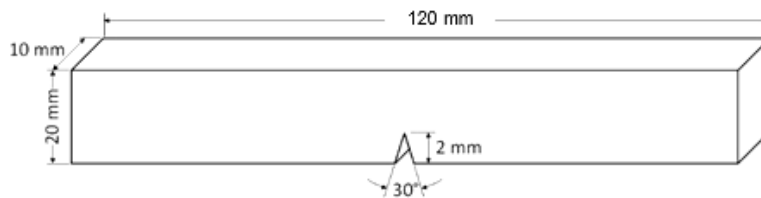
Single edge-notch specimen extraction in a three-point bending test.
